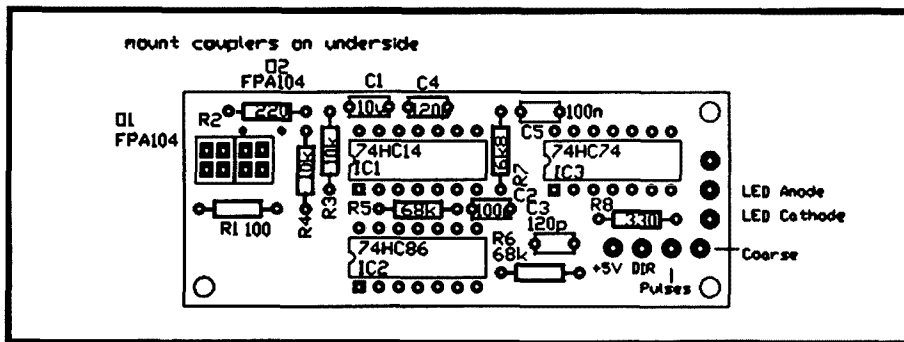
Circuit board layout, shown actual size. (Drawn by Keith Gooley VK5OQ)
